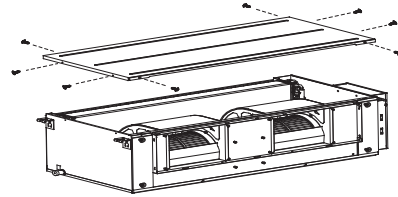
Motor Maintenance sizes 09K-48K
